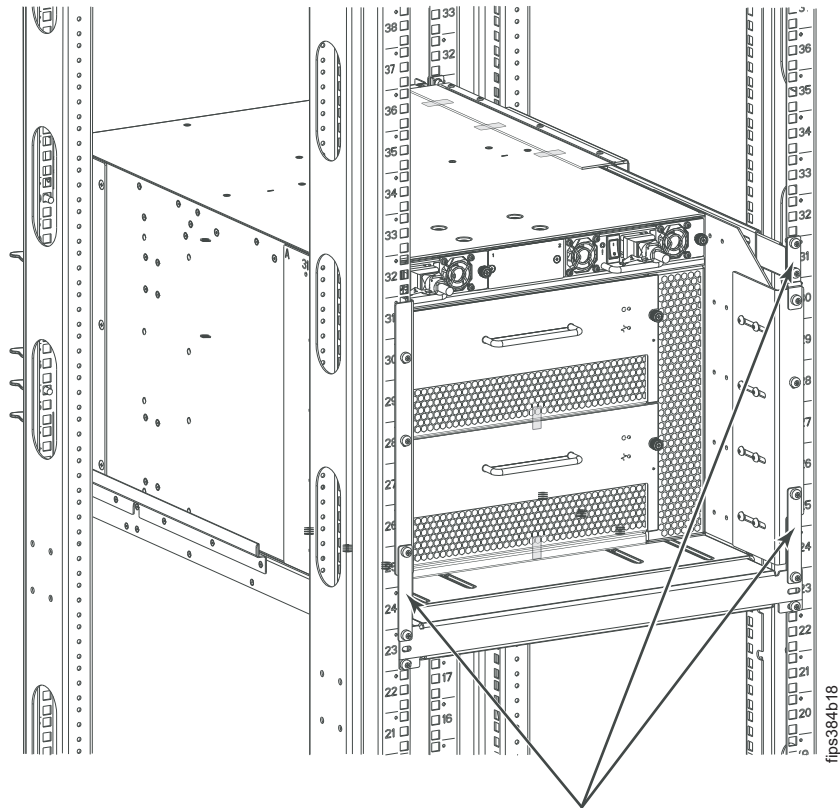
Three 2499-192 rackmount FIPS brackets installed on non-port side
